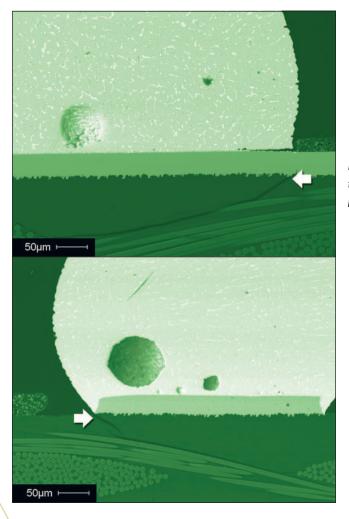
SEM images displaying fractured laminate beneath the pads of the soldered component.
